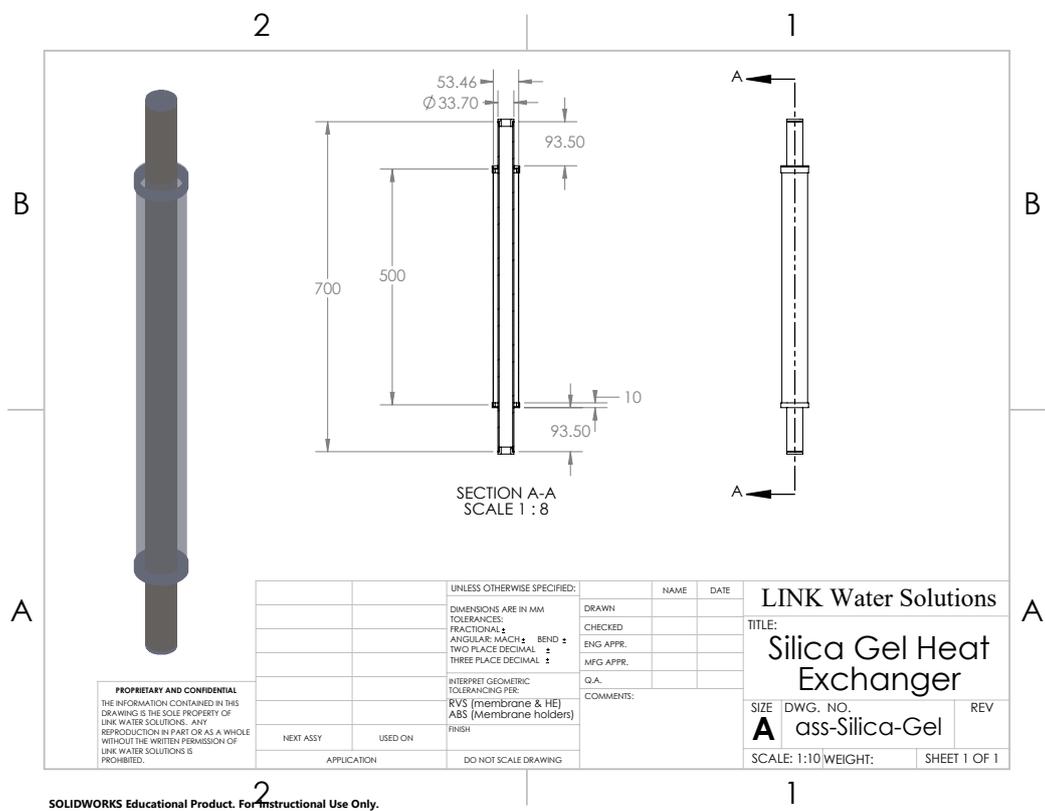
Technical drawing of the silica gel covered heat exchangers
